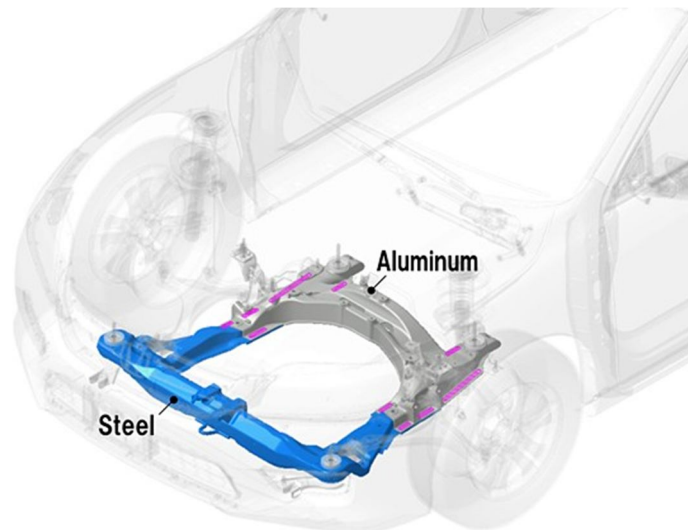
Friction stir welding technology adopted in Honda Accord for joining aluminium and steel in front sub frame [4].
